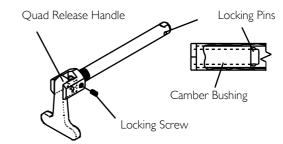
Adjusting The Quad-release Handle - In or Out
